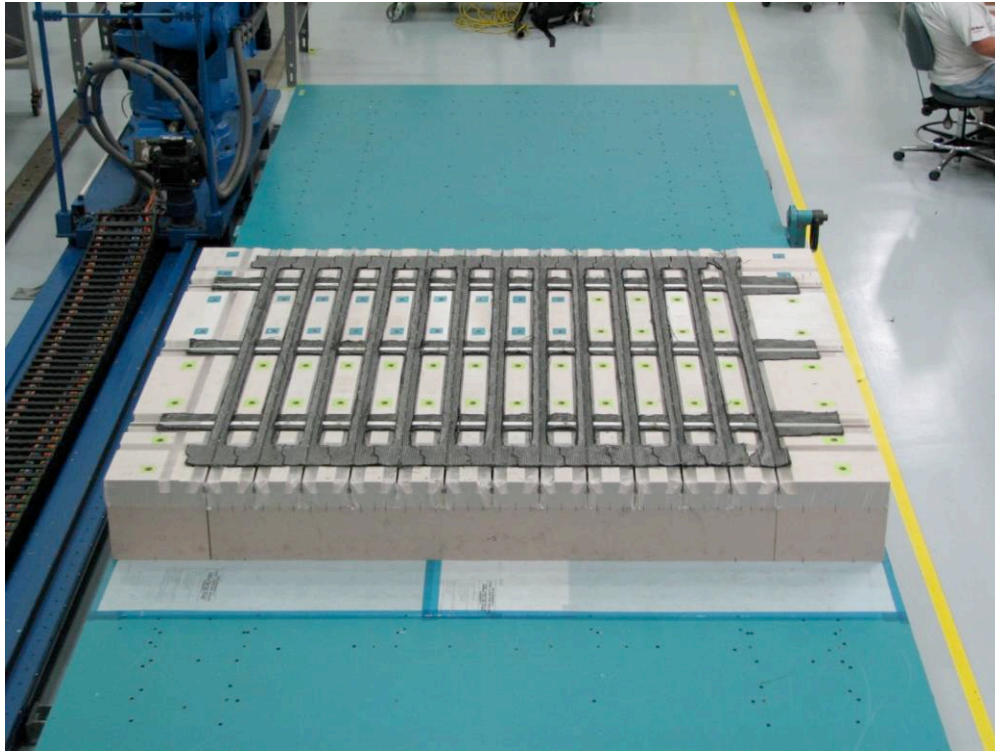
Outer Rib Preform Assembly – Frames and Stringers Installed
